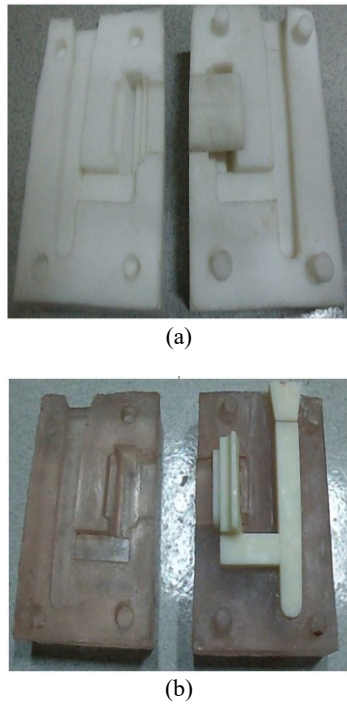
(a) Silicone rubber mold, (b) epoxy resin mold
